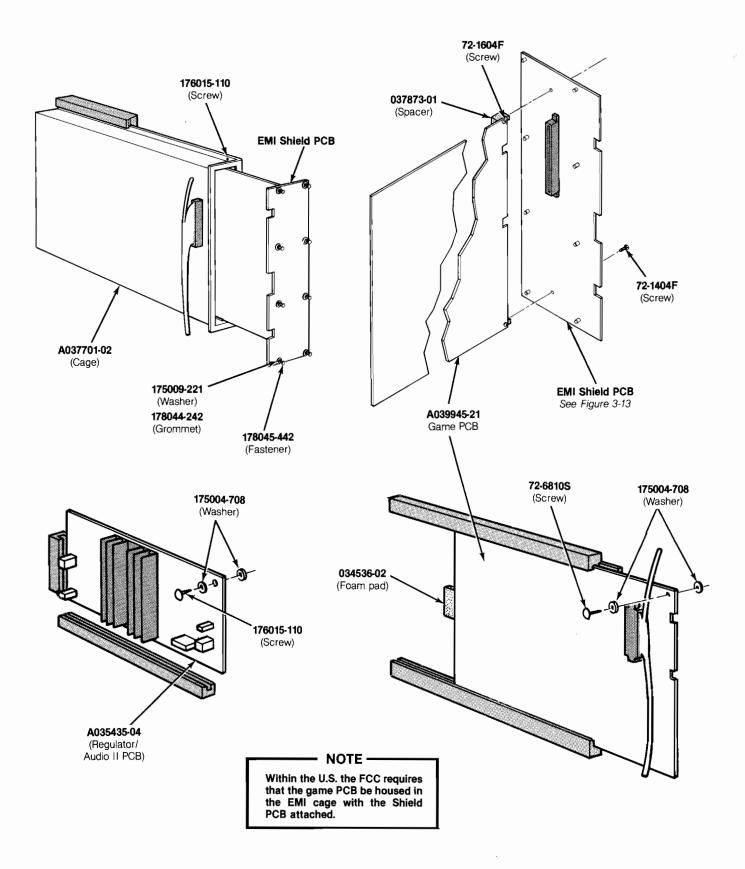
Electromagnetic Interference (EMI) Cage Assembly and Printed-Circuit Board Mounting Hardware
